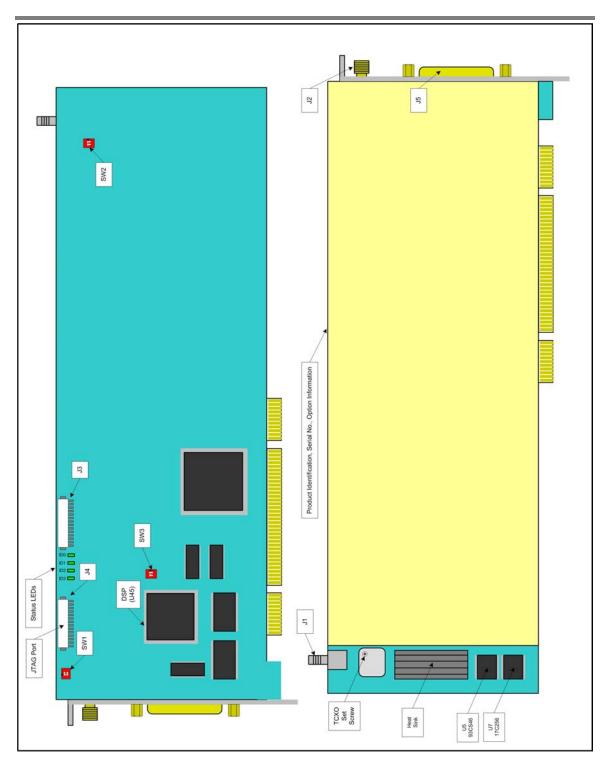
LS-25/LS-25-D PCI Outline Drawing
